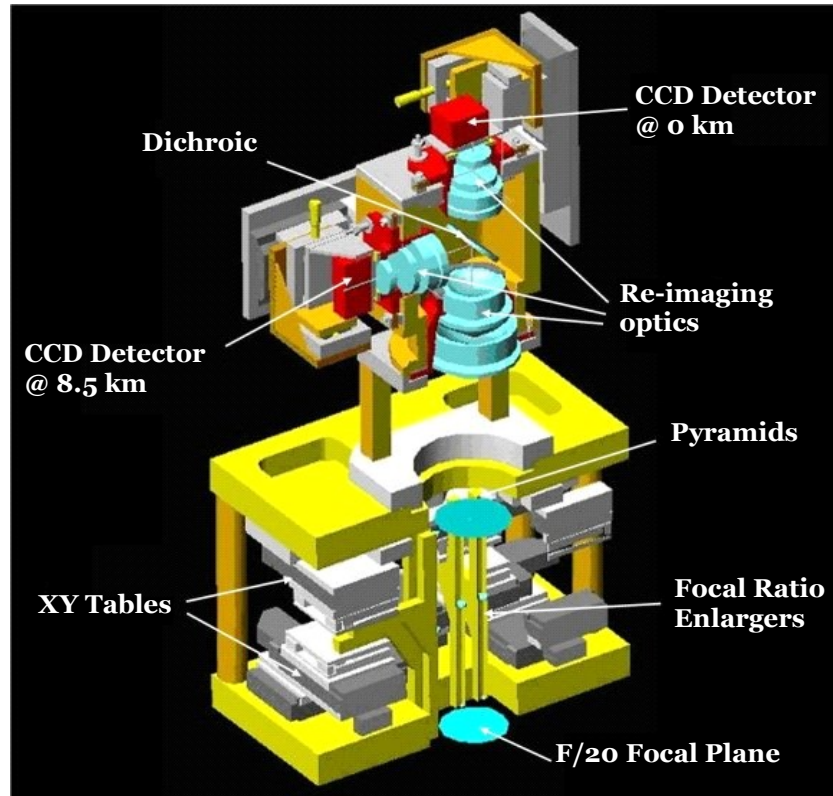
Opto-mechanical layout of the MAD LOWFS.
